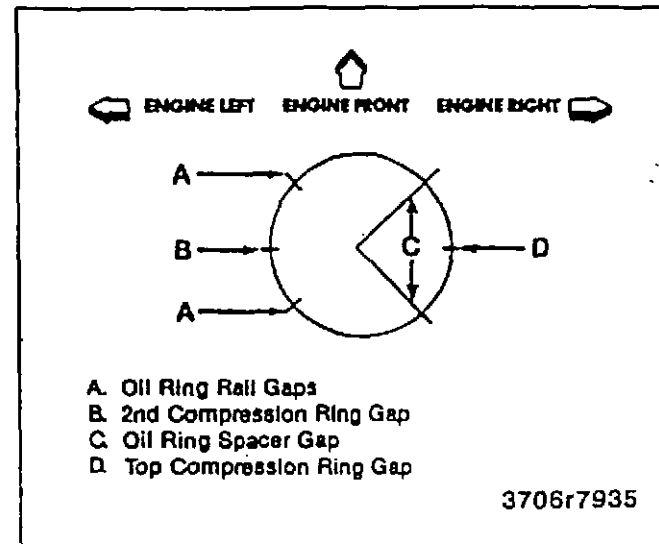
Piston Ring End Gap Location (7.4L Engines)
